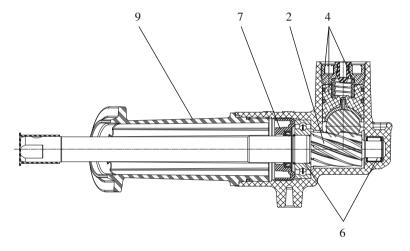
Cut of the pinion case of a mechanical rack-and-pinion gear
